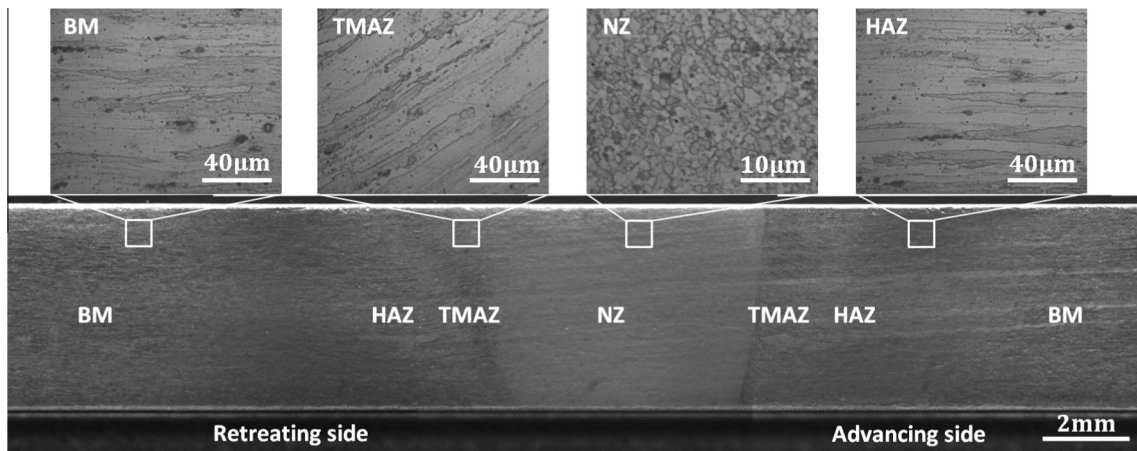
Metallographic cross-section of the FSW weld.
